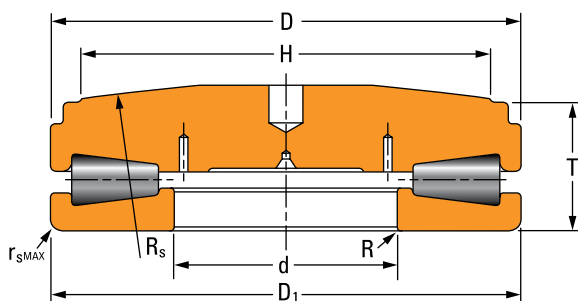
Type TTHDSX thrust tapered roller bearing assembly.
